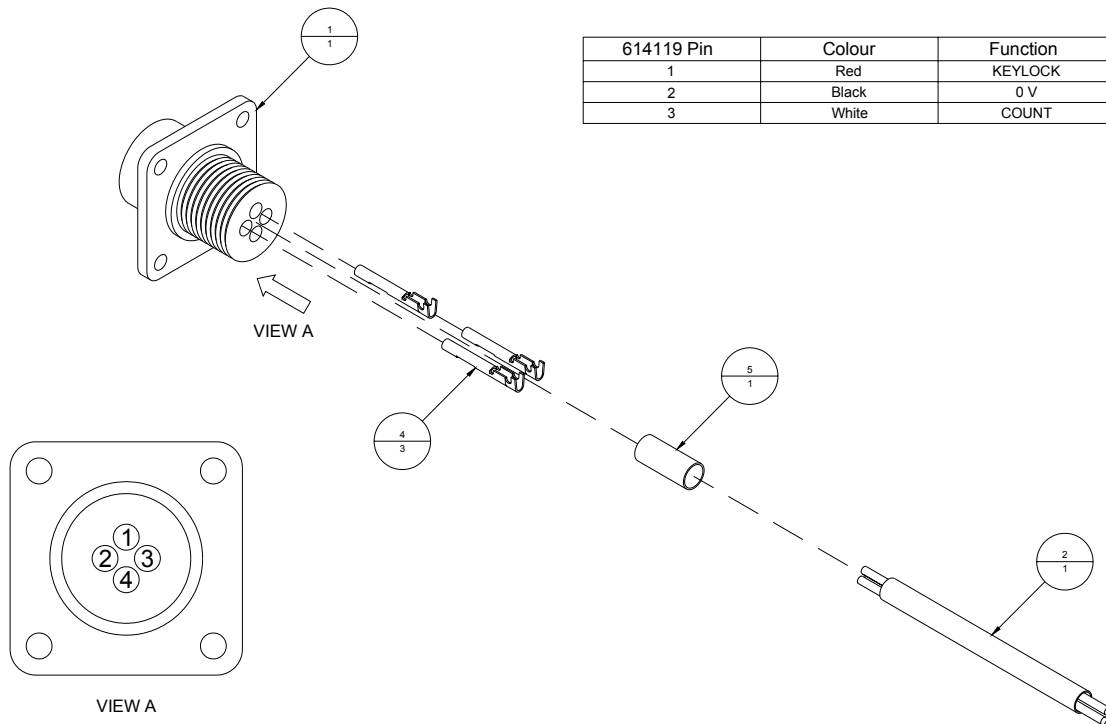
Cable, Counter Receptacle Assembly (9102435A)
